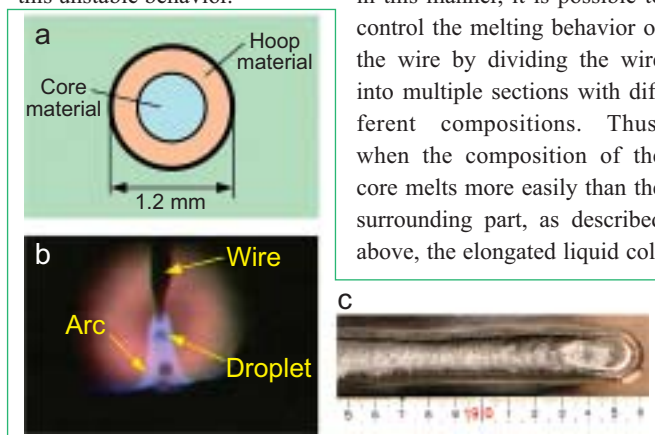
NIMS hybrid welding wire. (a) Structure of wire. (b) Behavior of arc and droplet on the wire tip under pure Ar. (c) Appearance of weld bead.
